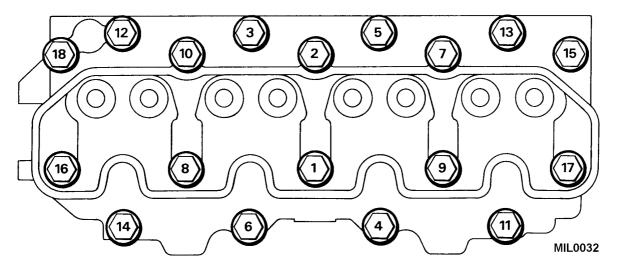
Bolt locations and Tightening sequence for cylinder head.
